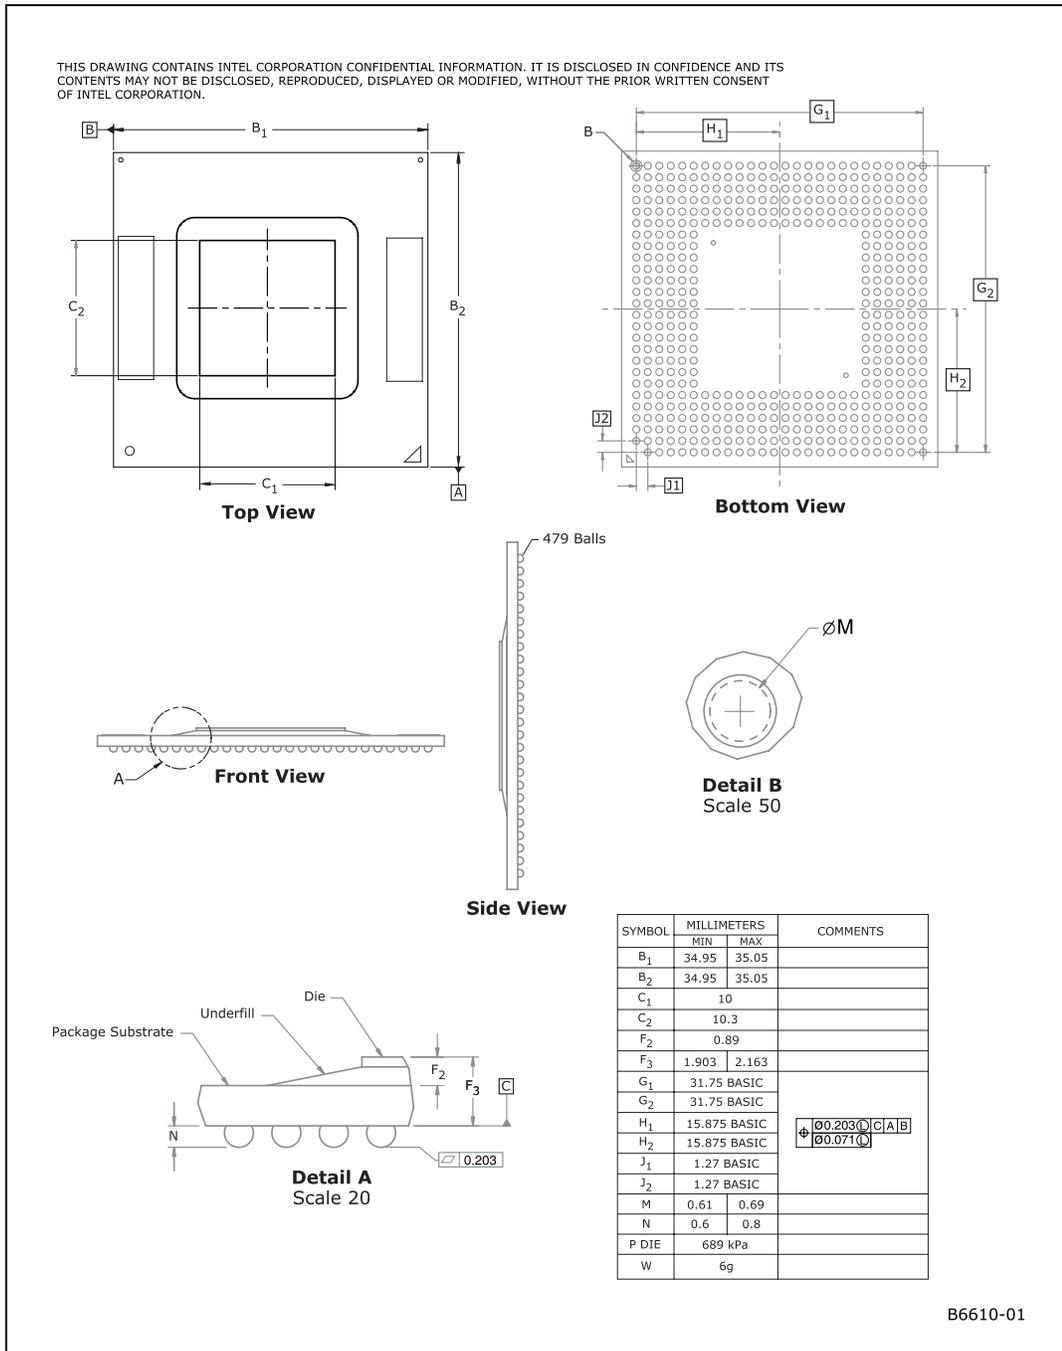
1 MB Micro-FCBGA Processor Package Drawing (1 of 2)
